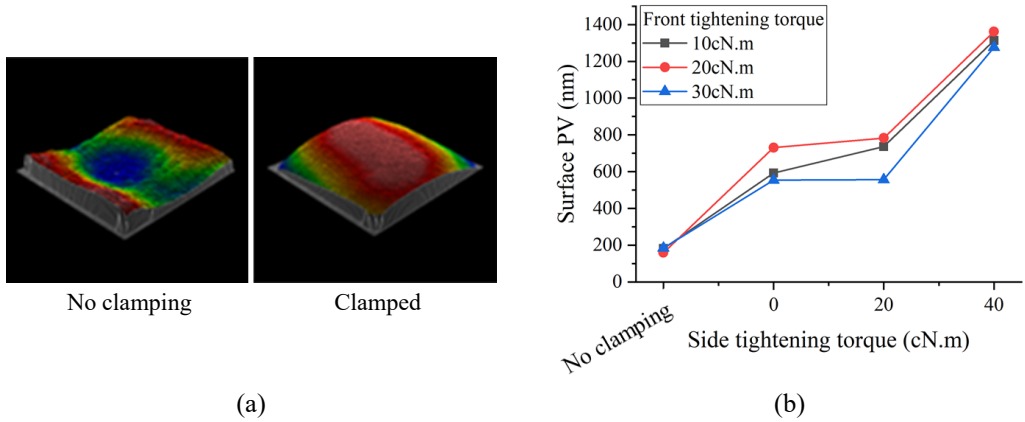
Experimental results of three-point rubber nails clamping on the front and full rubber nails on the sides clamping scheme. (a) Typical clamping surface shape. (b) Results of surface PV.
